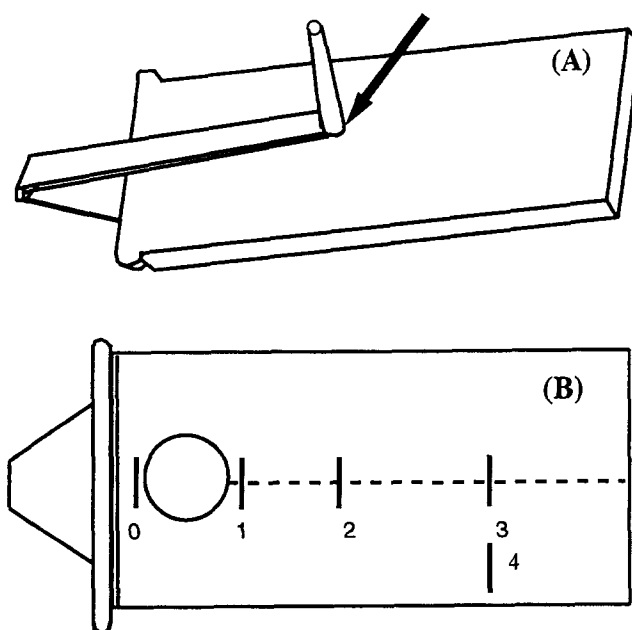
Injection-moulded plaques, shape and positions at which samples were taken
